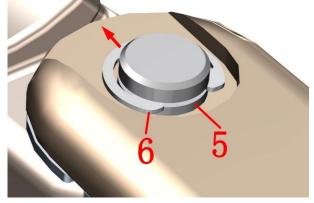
FOOT PEDAL COMPONENT		L, foot pedal holder component-3	CHK	Q
